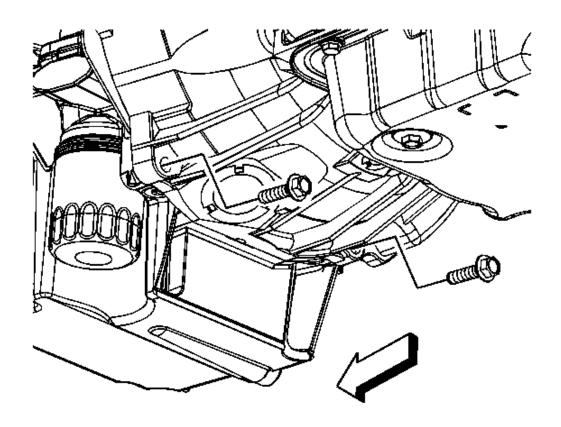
View Of Lower Transmission Bolts Courtesy of GENERAL MOTORS CORP.
